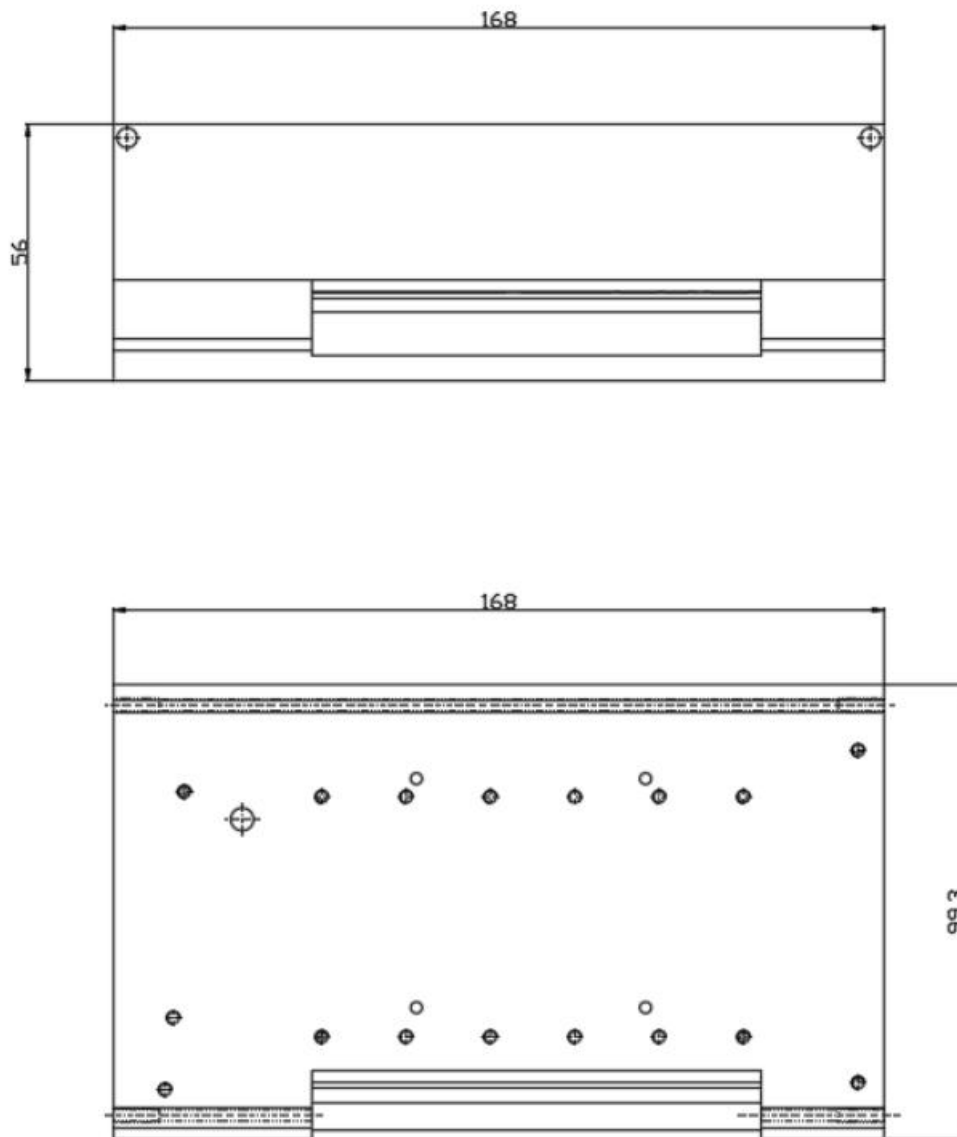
NSP-SERVO-DC-20 dimension drawing(mm)
